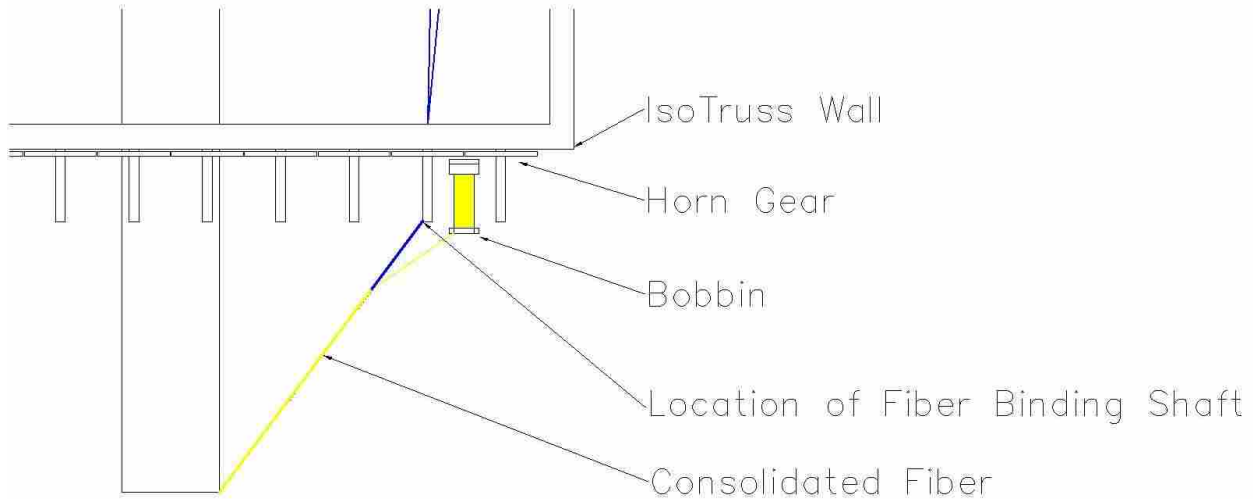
Fiber Causing IsoTruss Machine Shaft to Bind
